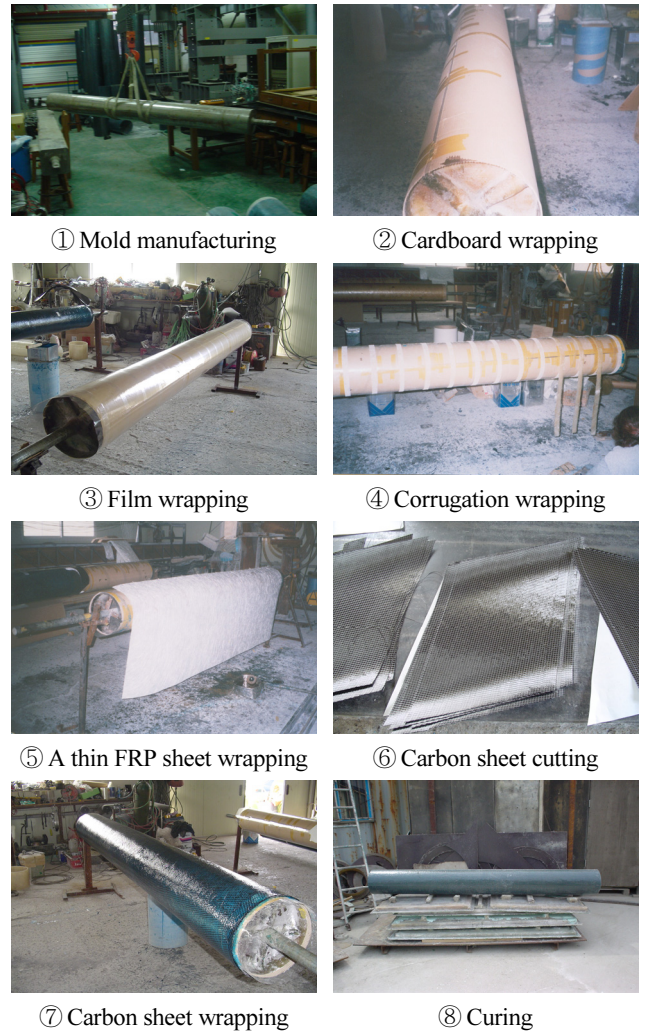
Manufacturing Process of Circular Carbon Sheet Tube
